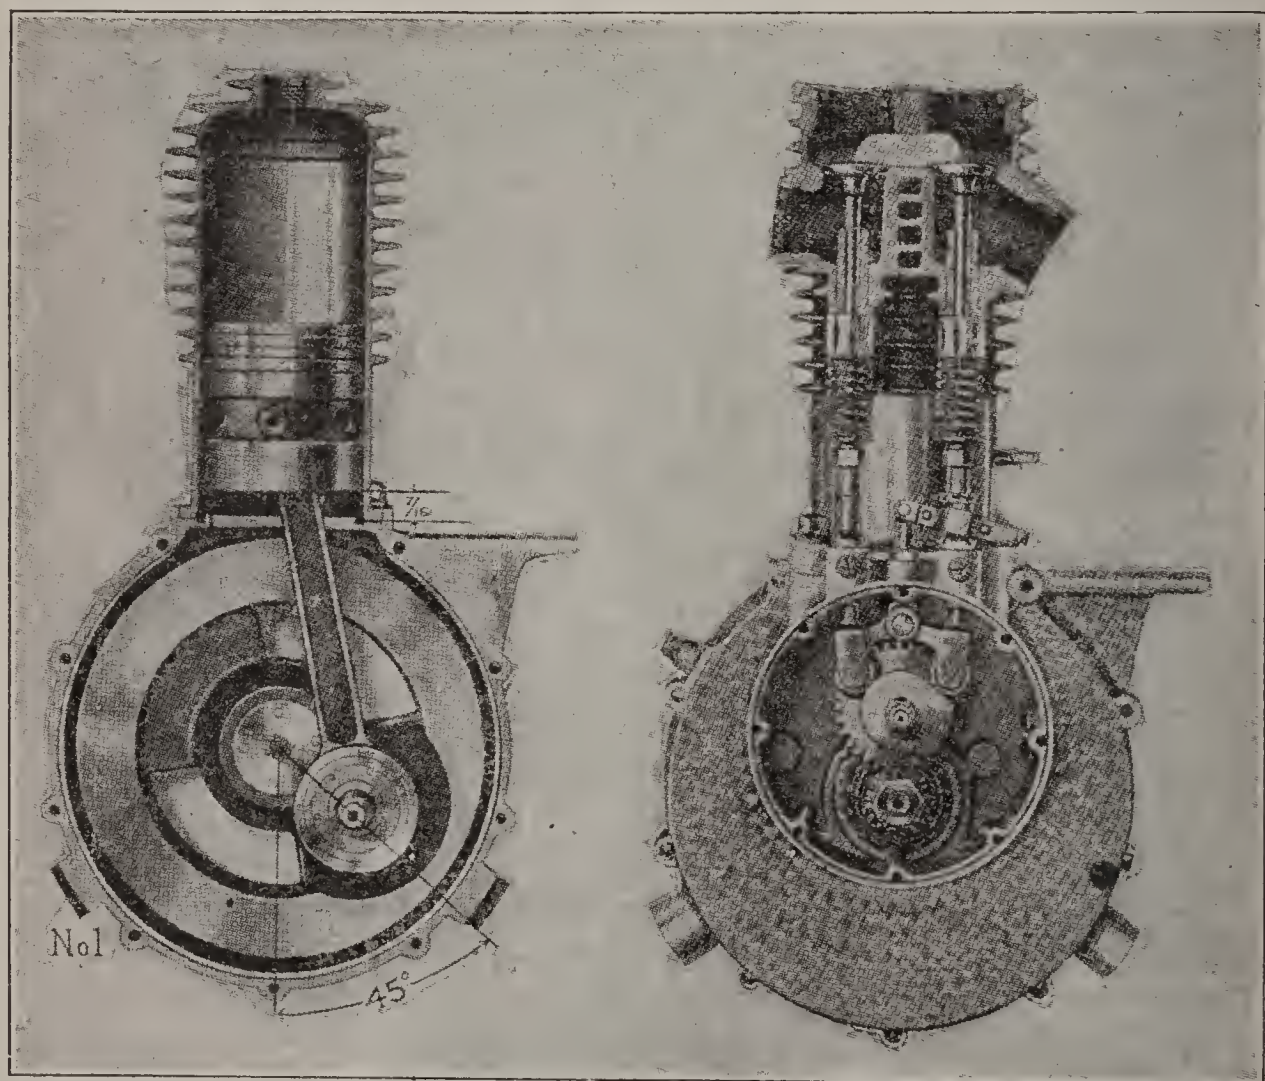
Sectional View Showing Point in Crank Pin Travel at Which Exhaust Valve Opens on Thiem Single Cylinder Motor.
